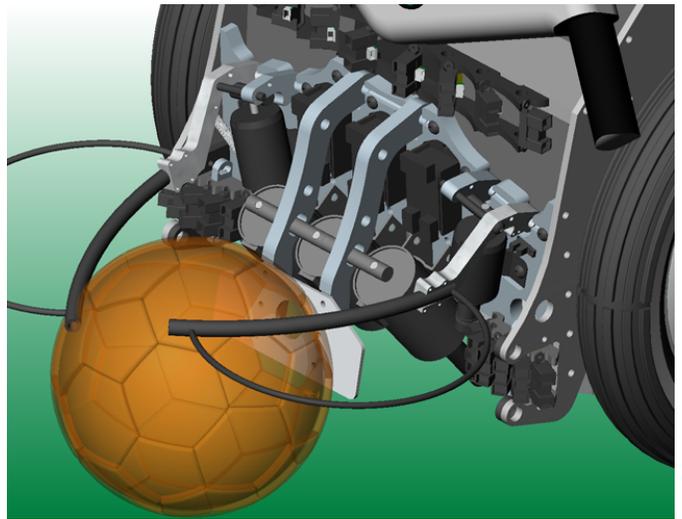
A CAD model close-up of the solenoid driven kicking and ball-catching actuators. Note the banks of IR sensors mounted just outboard of the catcher solenoids, and also above the entire ball-handling assembly. The lower IRs detect balls, the upper obstacles.
